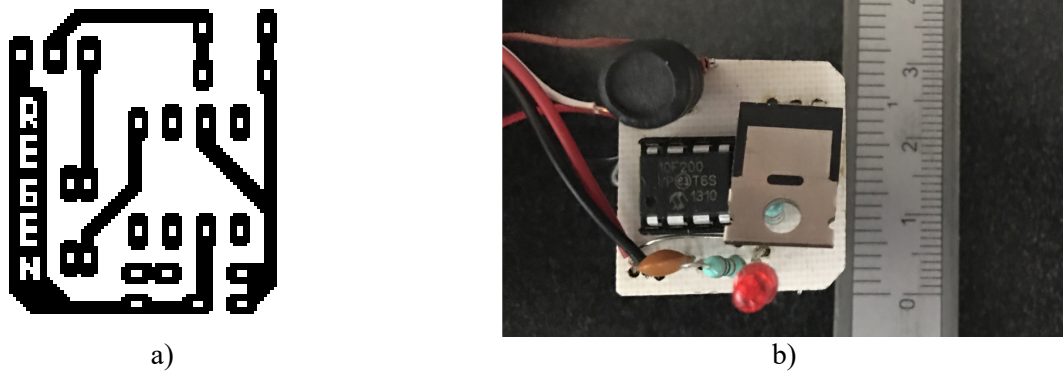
a) Prototype PCB layout. b) RFD prototype implemented with commercial components.
